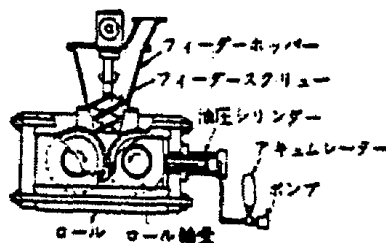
A schematic diagram of the roll type tablet machine
